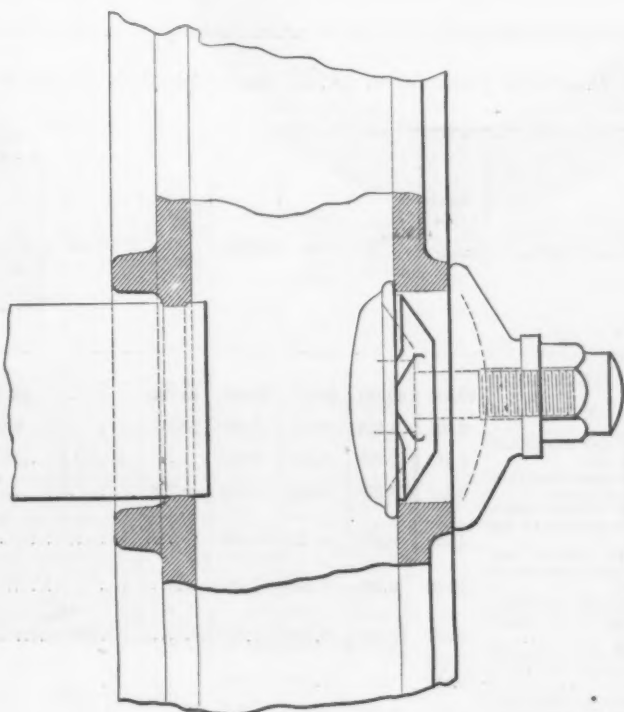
Showing Arrangement of Tube and Hand Hole.
